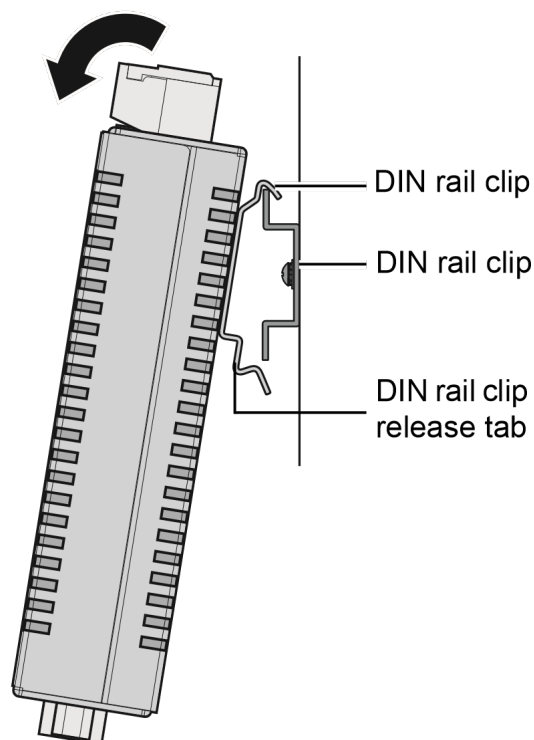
Installing the DIN-Rail Mounting Kit (EKI-1211 Series)
